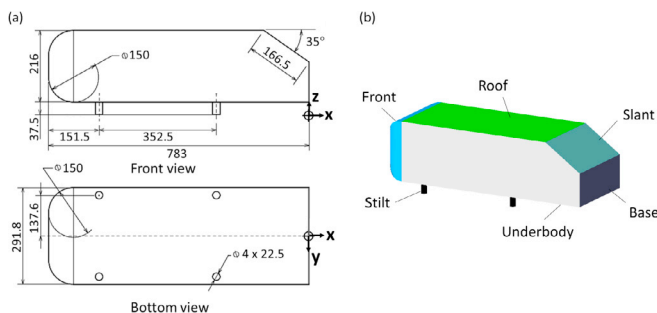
(a) Ahmed body at 75% scale, and (b) the designations of body parts; dimensions are in millimeters.
